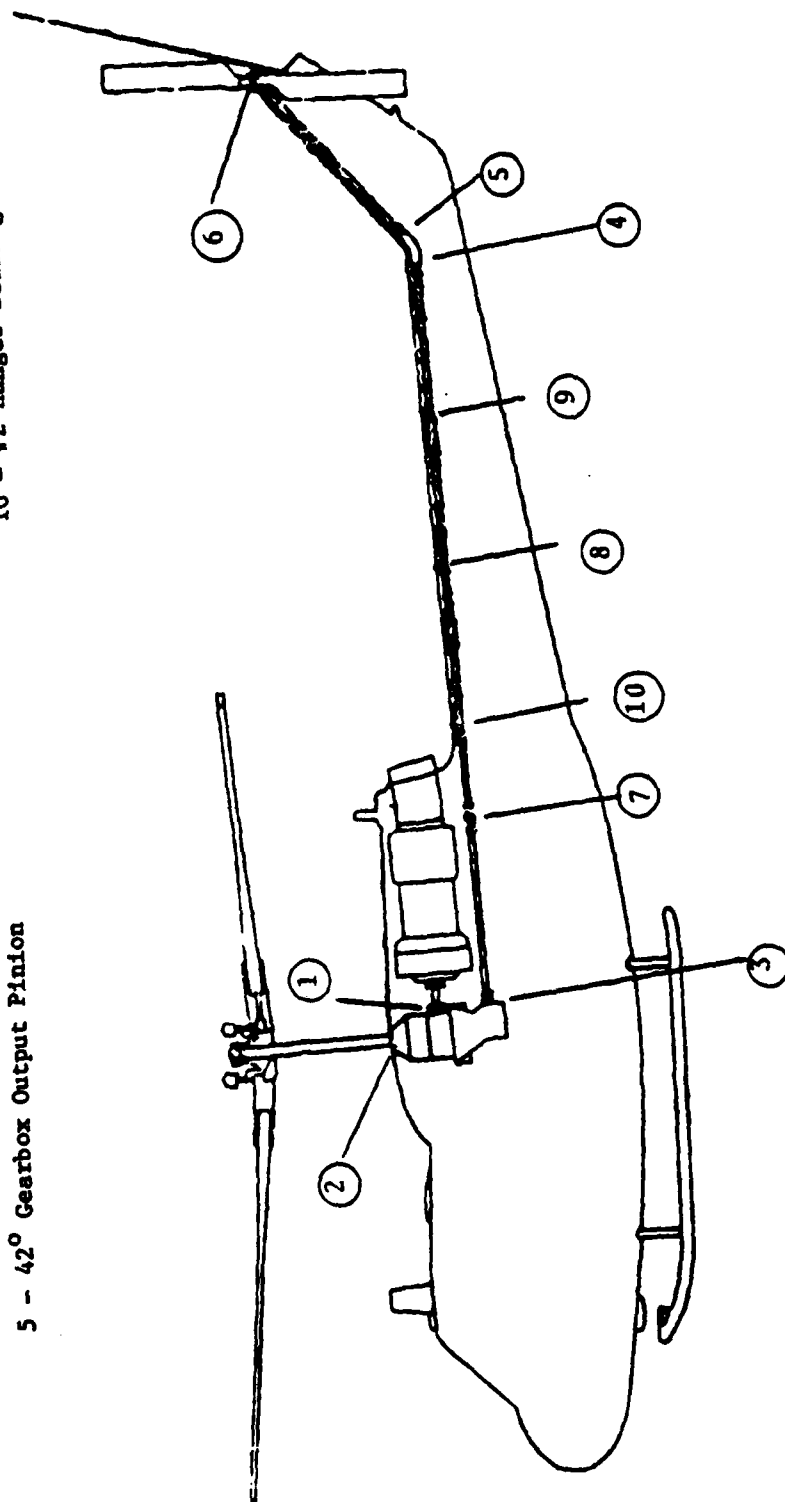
UH-IH COMPONENTS & SENSOR LOCATIONS
